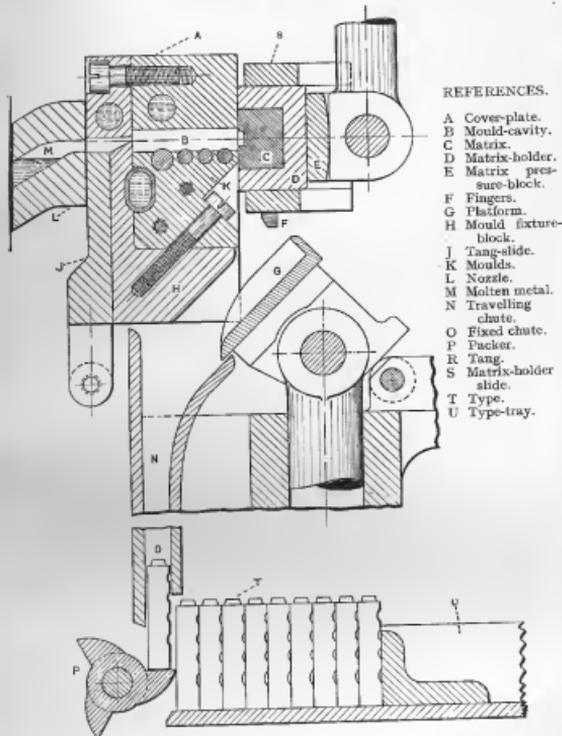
Blissetype; vertical section through a mould in the casting position.
